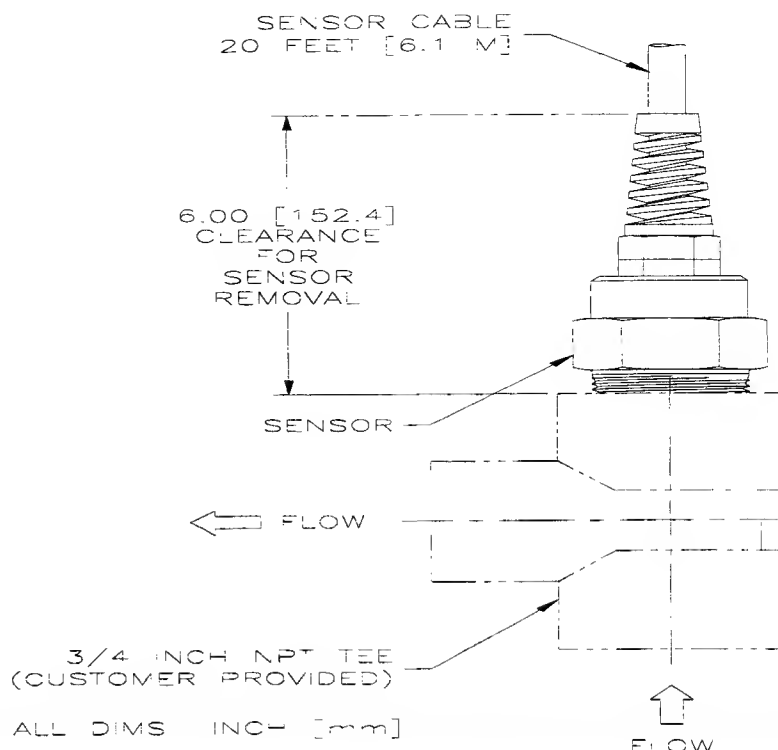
Installing Sensor Into Pipe Using a Tee
